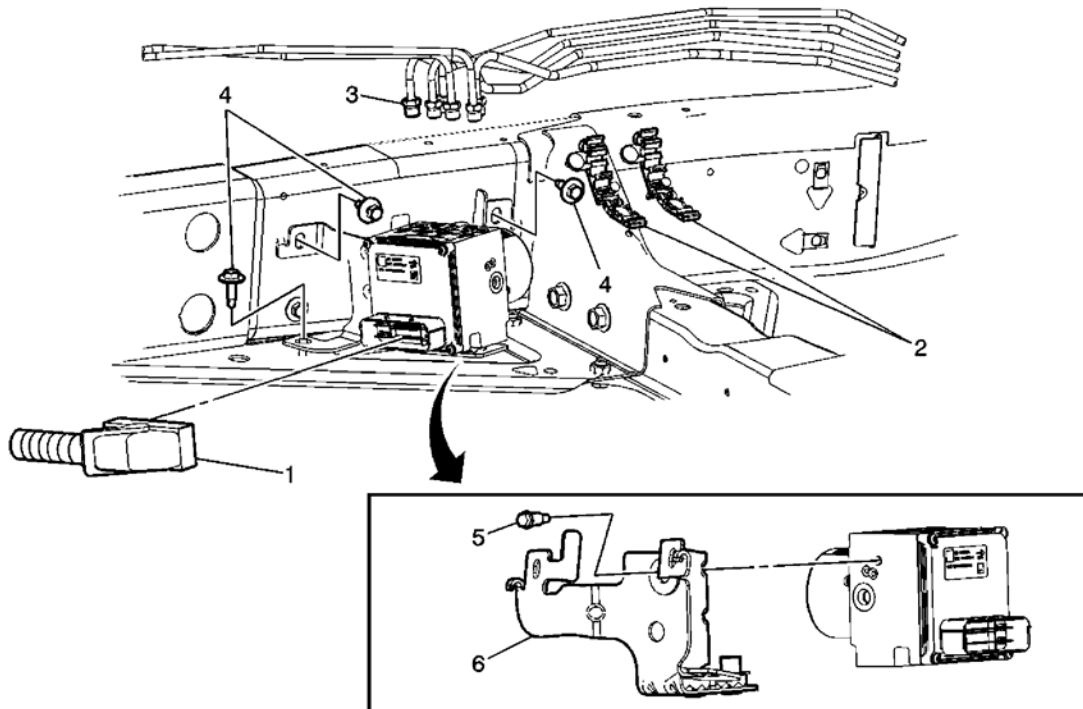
Identifying Brake Pressure Modulator Valve Bracket Components
